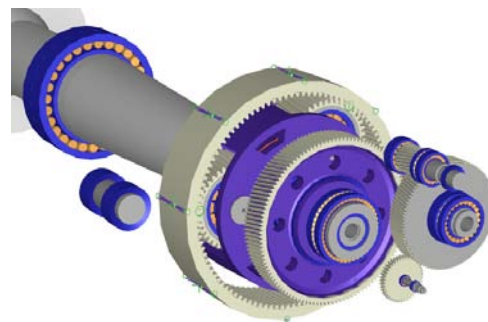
RomaxWind drivetrain model showing the single stage planetary and two parallel stage gearbox arrangement
